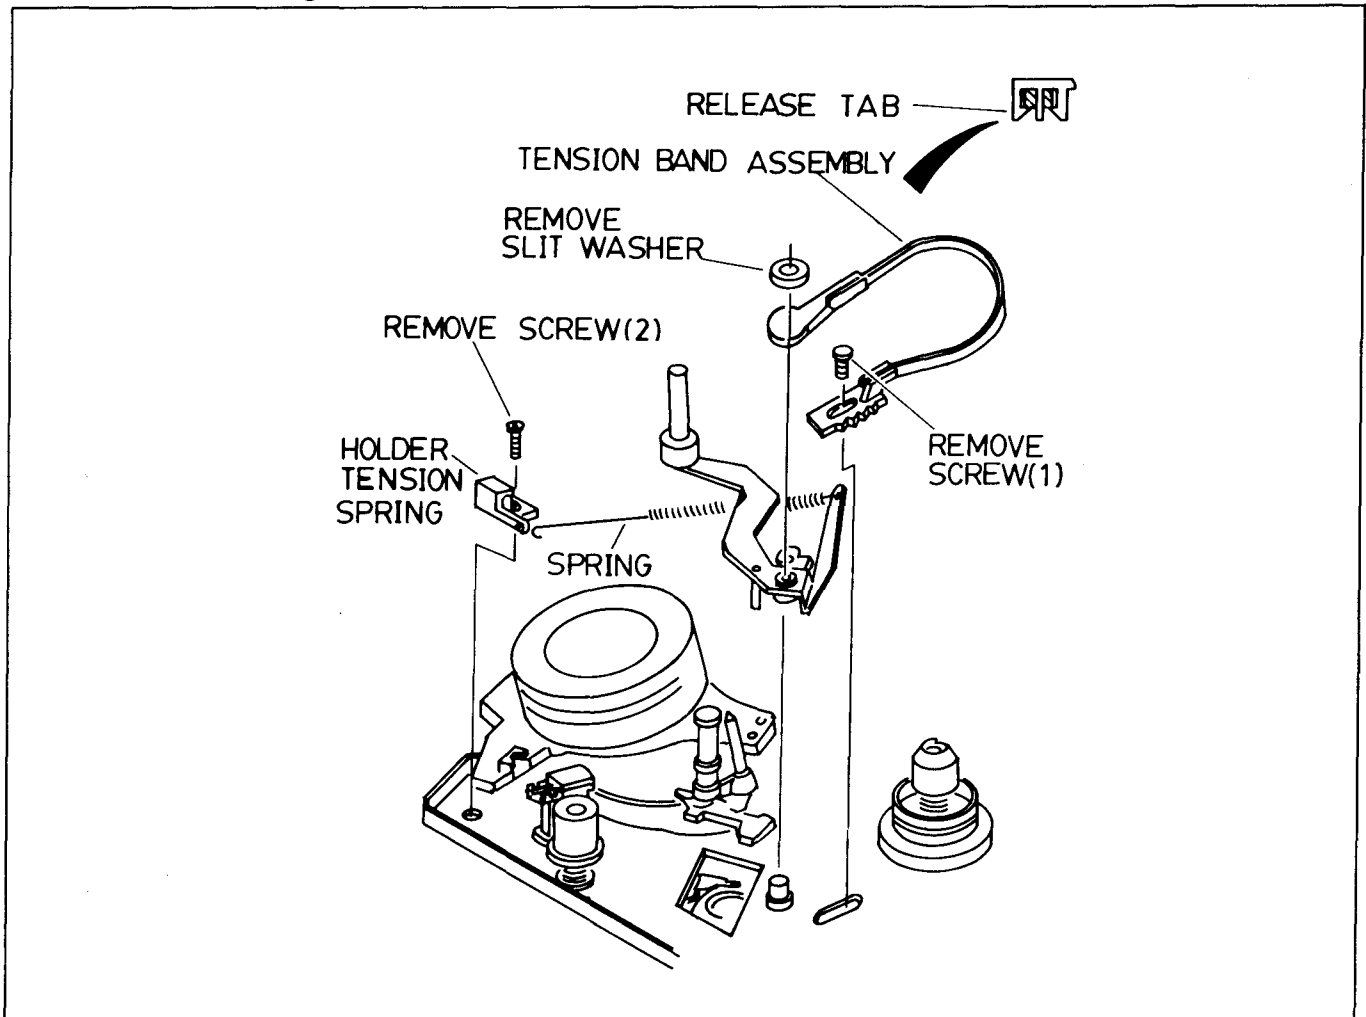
Arm Tension Assembly, Tension Band Assembly and Holder Tension Spring Removal
